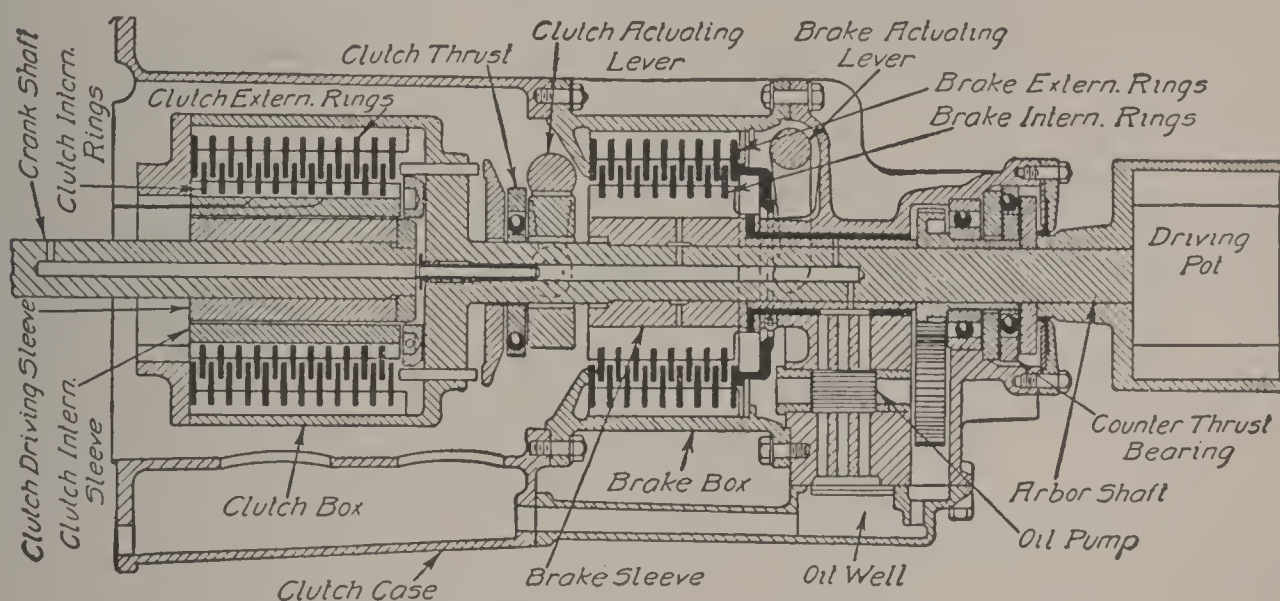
Lanchester (English) Disk Clutch and Disk Brake
